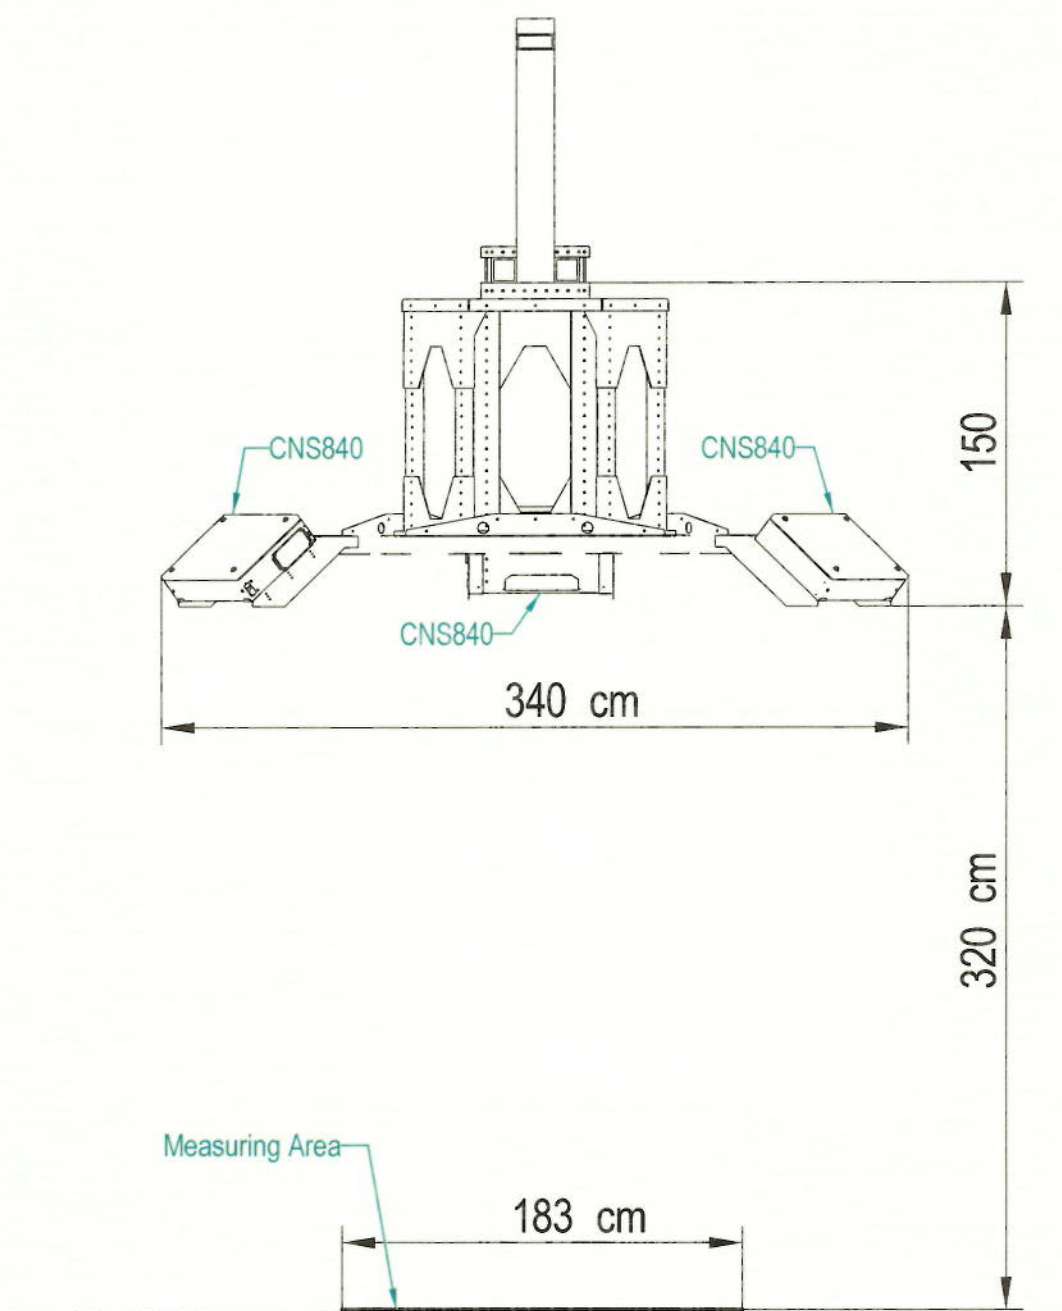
Drawing showing the dimensions of CSN840: Mechanical Layout of system (side view). Dimensions in mm. Mounting height is 600mm higher than tallest object to be measured. Illustrated system can measure objects of height 2600mm
